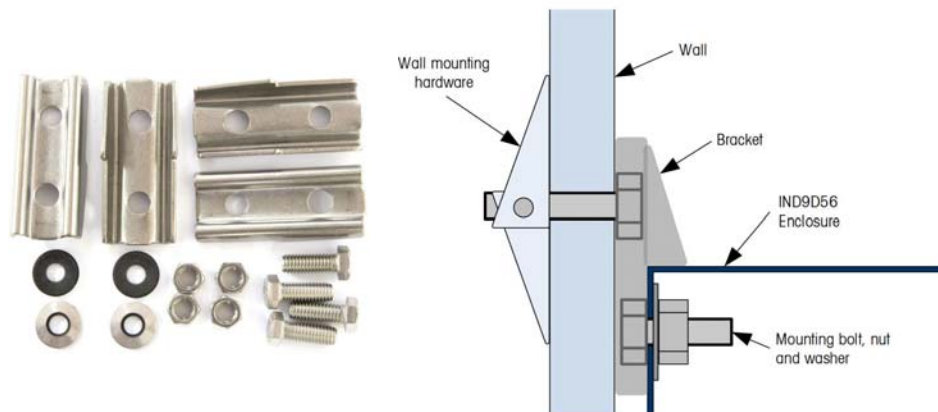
Wall Mounting Bracket Kit (left) and Mounting Method (right)
